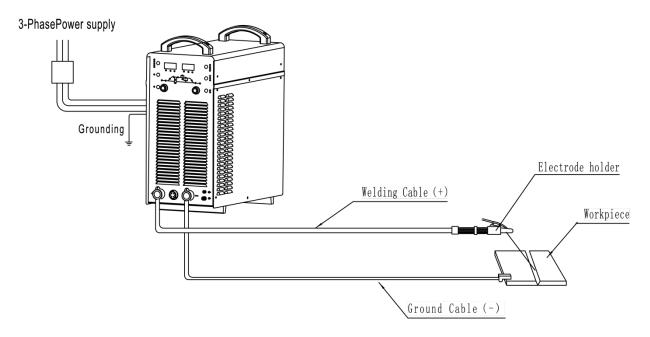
Connection and operation for SMAW welding
